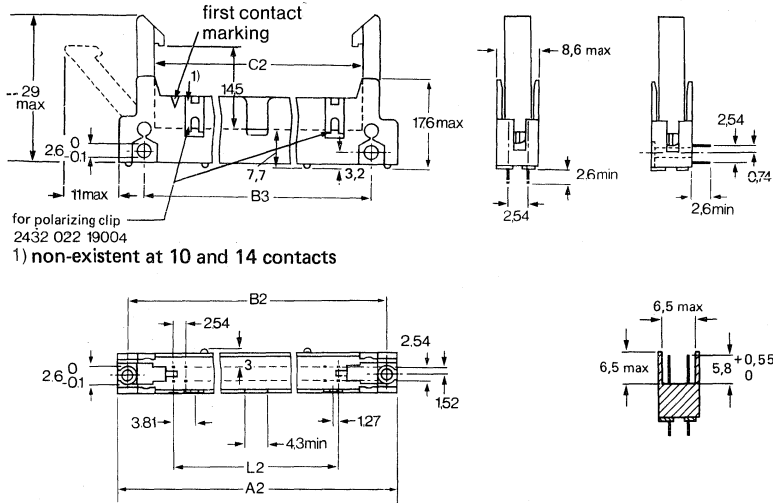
Male header with dip-solder pins, and clamp/ejectors (2432 022 19002) for cable connectors with strain relief; see Table 5 for dimensions A2, B2, B3, C2 and L2.
